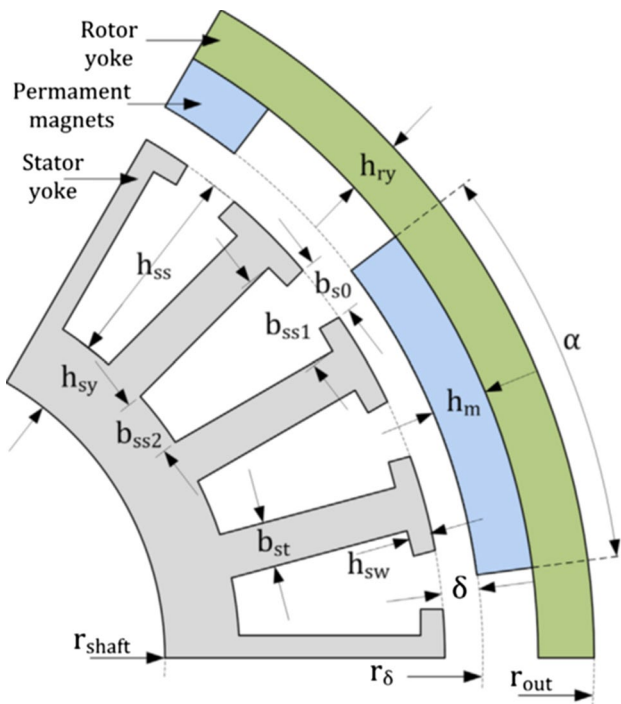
Geometric parameters of outer-rotor BLDC motor [23]
